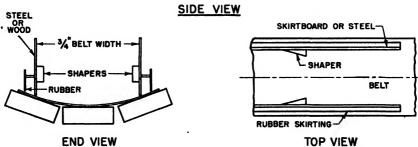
Conveyor-belt skirt boards used on 48-inch conveyor carrying coal. Lower edge of each board is 6 inches in from belt edge (1/6 belt width), and edge clearance increases in direction away from loading point. Soft-rubber skirting (lower left) reduces spillage through tapered opening between boards and belt. Shapers guide lumps toward belt center.
